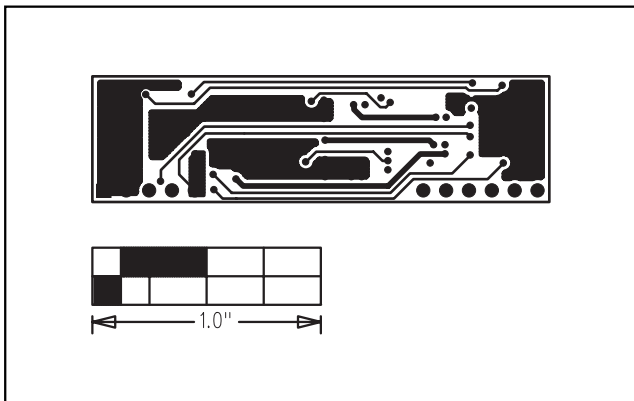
MAX5065 EV Kit PC Board Layout—Signal (Layer 2)
